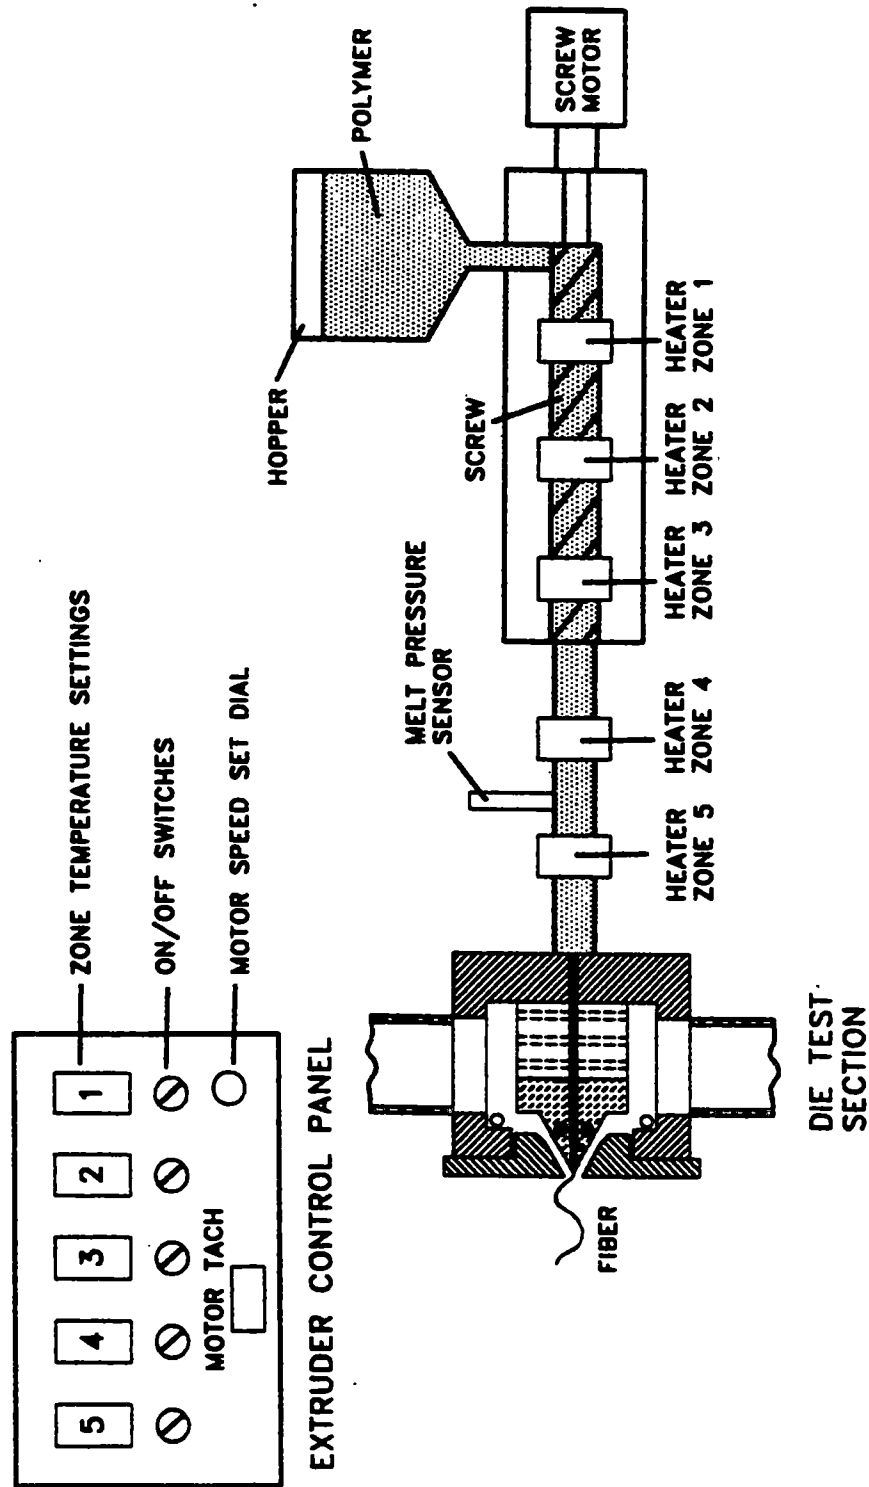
Cross-sectional view of the single screw extruder and the die test section
